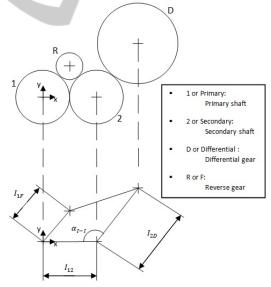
Datum set of the CMT-6M gearbox.
